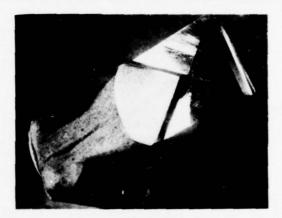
Fracture Surface of 7475-TMT1 Toughness Specimen 0724.
